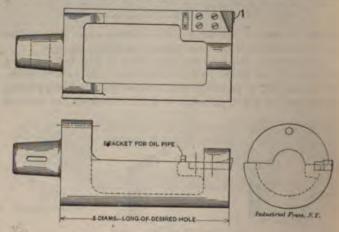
Hog Nose Tool Boring Head-Cast Iron.
